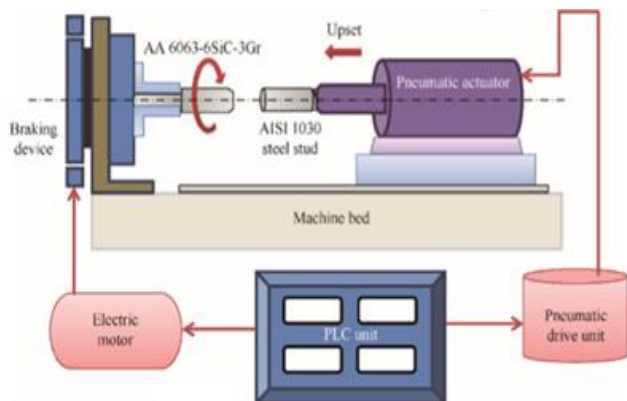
Friction Stir Welding Equipment [11]
